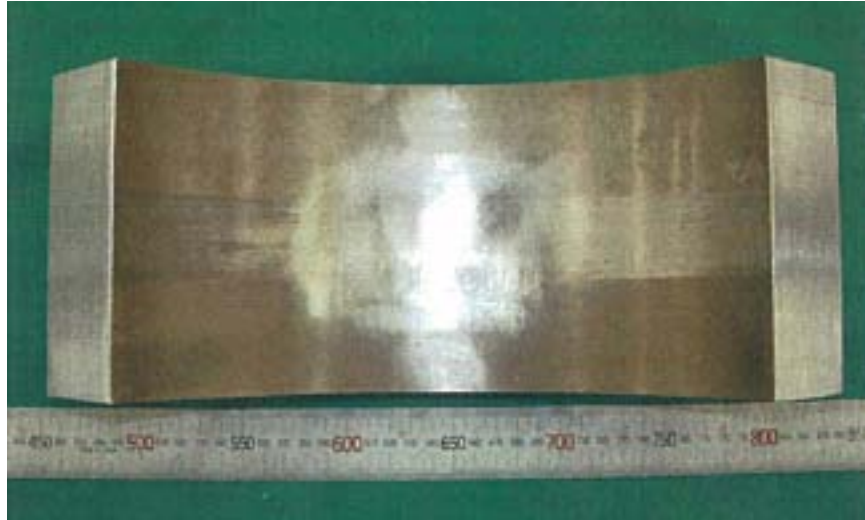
PINC Block 2.6 from JNES – PZR Surge Line to Safe-End Dissimilar Metal Weld
